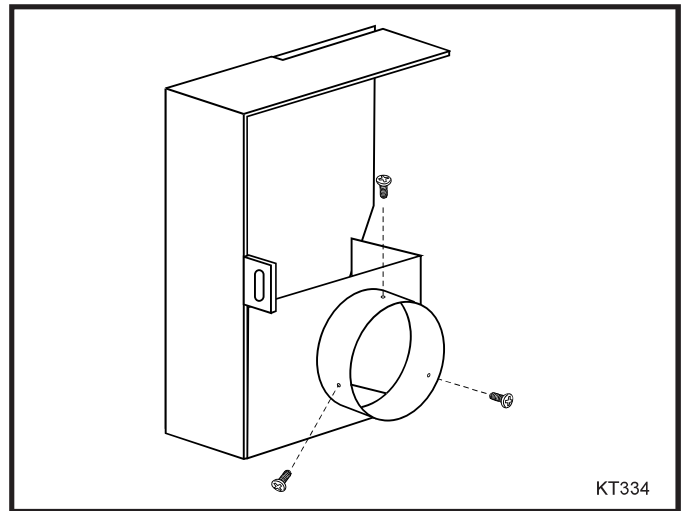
Drill 3 equally spaced holes in round adapter flange.
